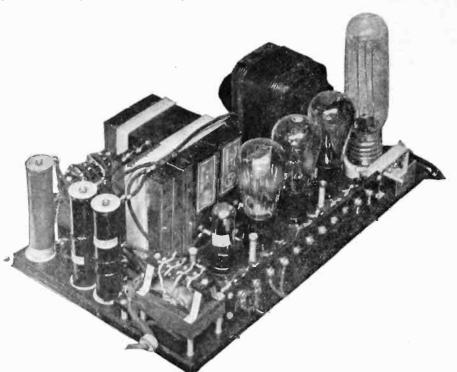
Rectifier-Amplifier Assembly, Showing Constructional Details.
